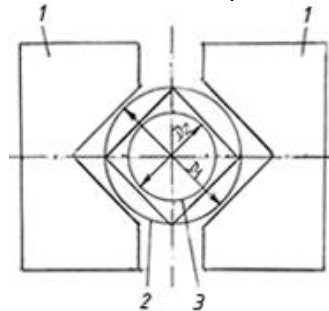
Scheme of centering a workpiece of circular cross-section with diameters D_1 and D_2 using figured sliders: 1 – figured sliders; 2 – workpiece with diameter D_1 ; 3 – workpiece with diameter D_2
